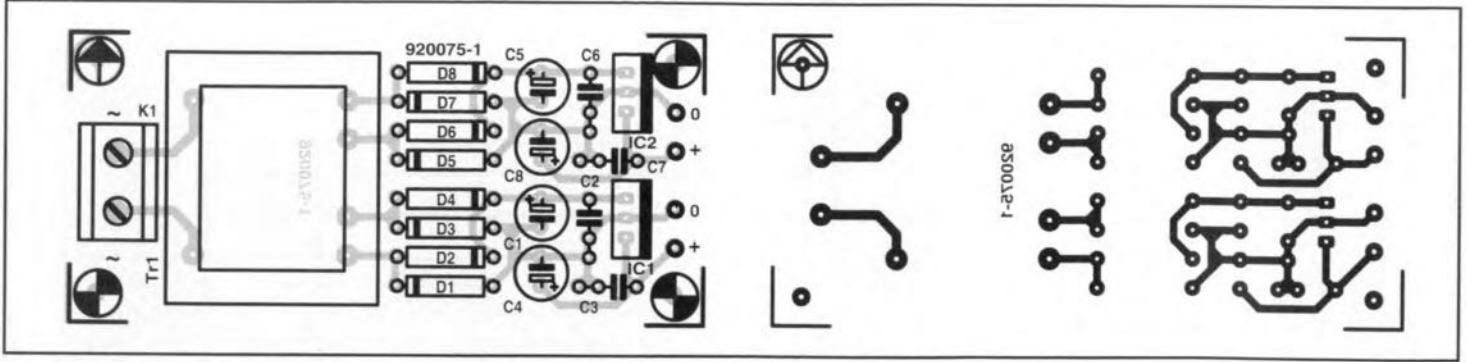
Printed-circuit board for the auxiliary supply for the digital meter modules.
